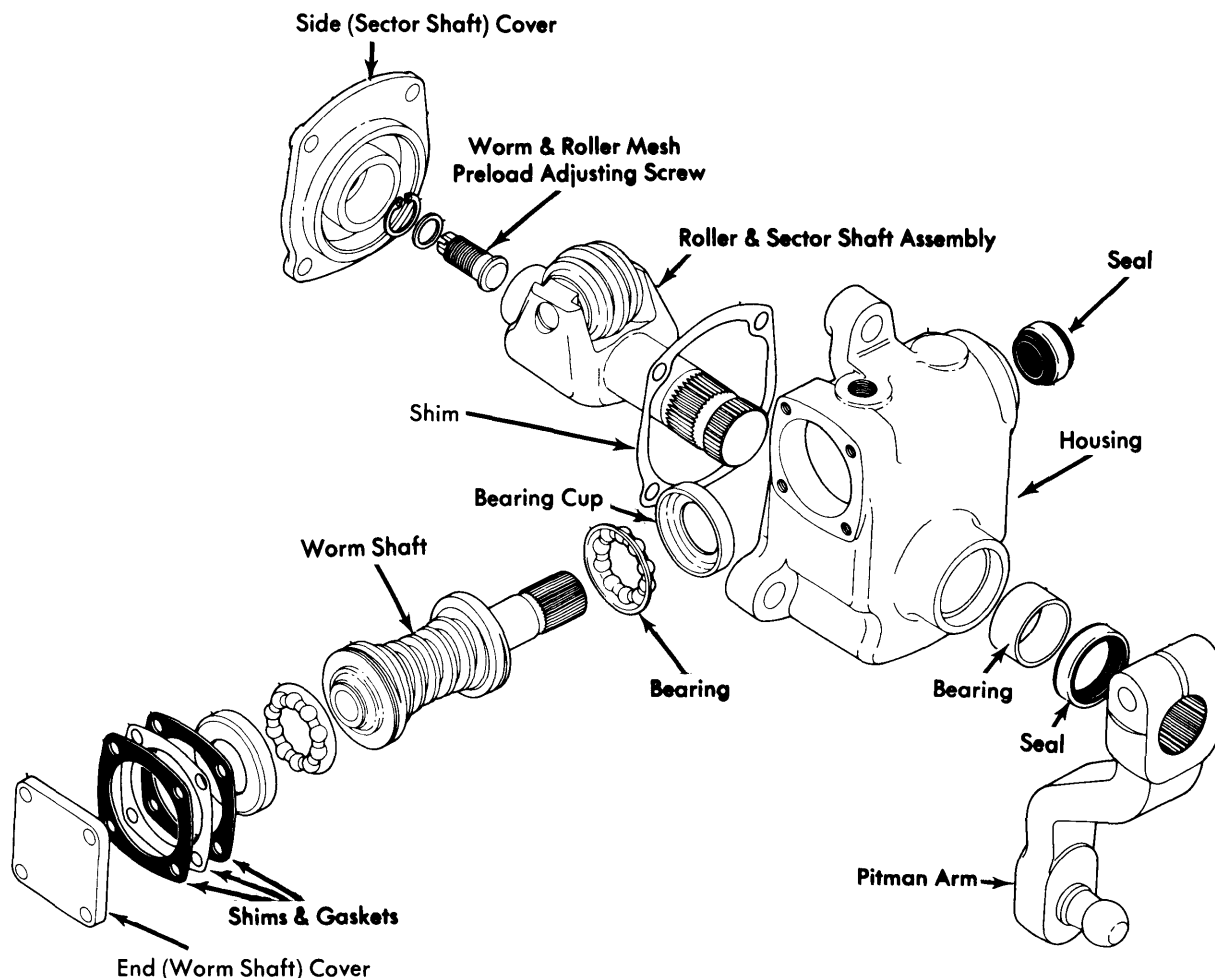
Disassembled Gemmer/Ross Worm & Roller Steering Gear
